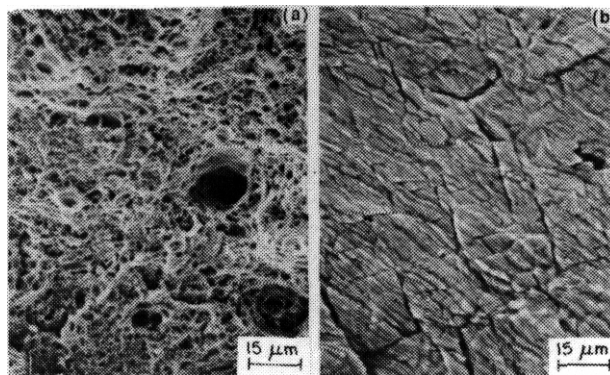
(a) The fracture surface and (b) gauge surface of the necked region of a weldment specimen tested in flowing Pb-17Li at 325°C.
